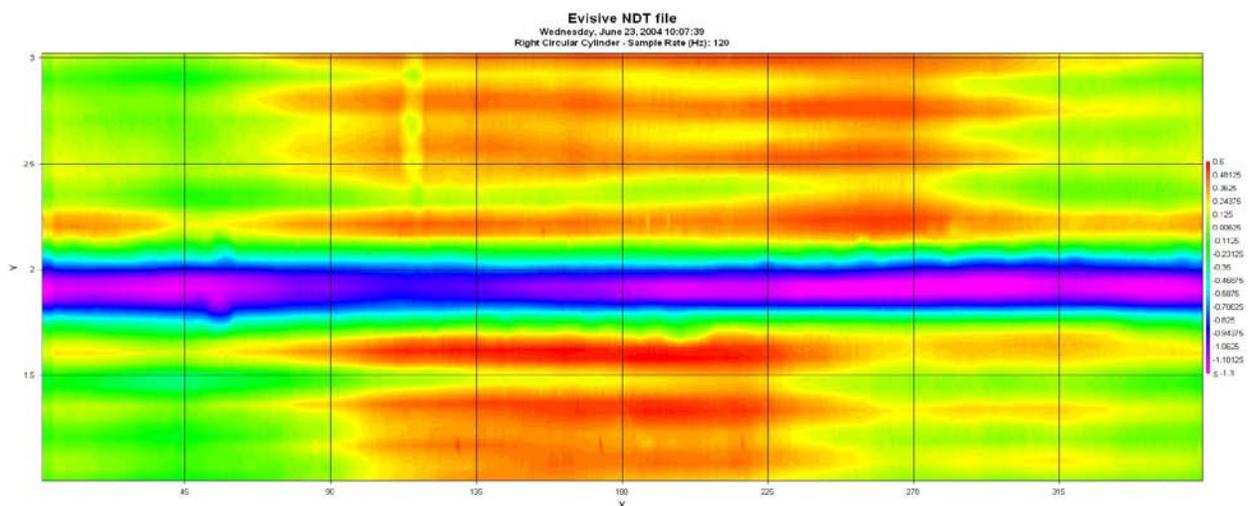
Evisive Scan image of an acceptable HDPE Thermal Butt Fusion Weld
